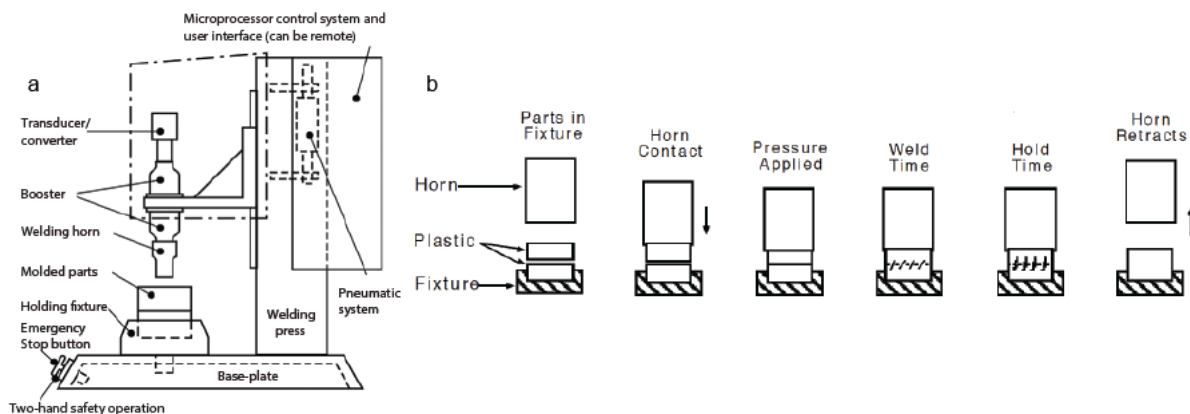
(a) Schematics of an ultrasonic welding machine. (b) Steps involved in ultrasonic welding. Briefly, the sonotrode(horn) is pressed onto the plastic parts and high frequency mechanical vibrations are applied. The sonotrode then retracts and the welded parts are removed. Figures adapted from Troughton, MJ[86] and Dukane Corporation[96].
